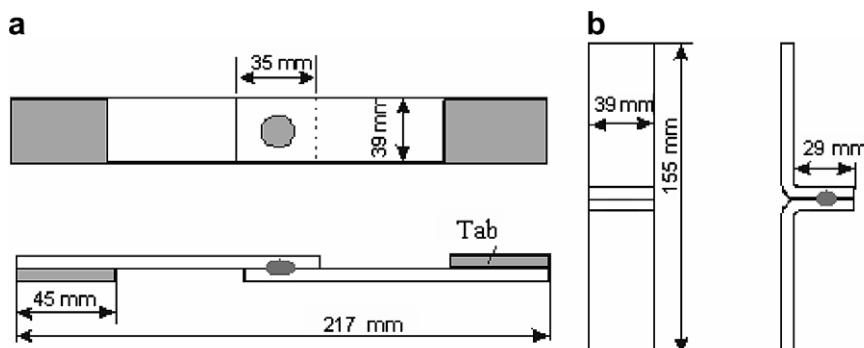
(a) Tensile shear type and (b) coach peel type fatigue specimens.
